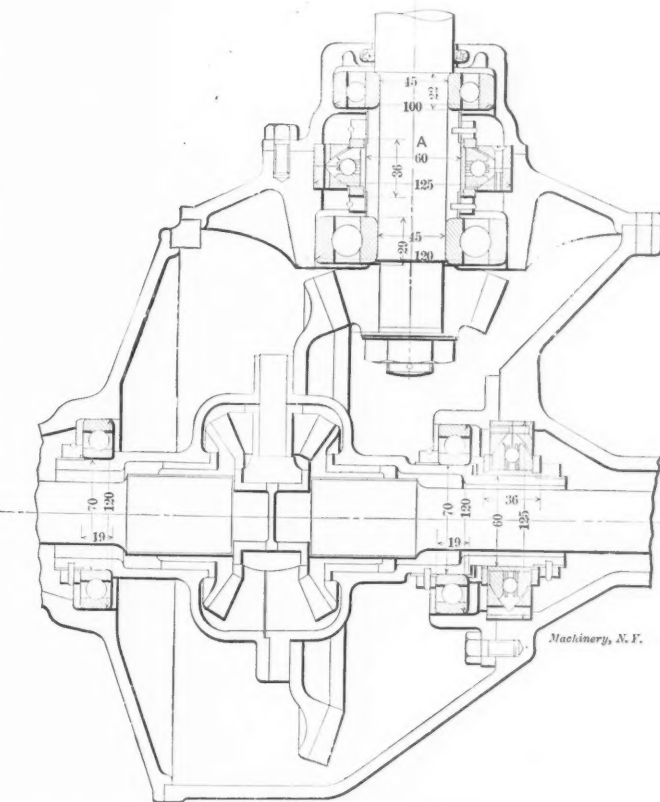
Automobile Rear Axle and Differential Gearing equipped with the Double Thrust Bearing
